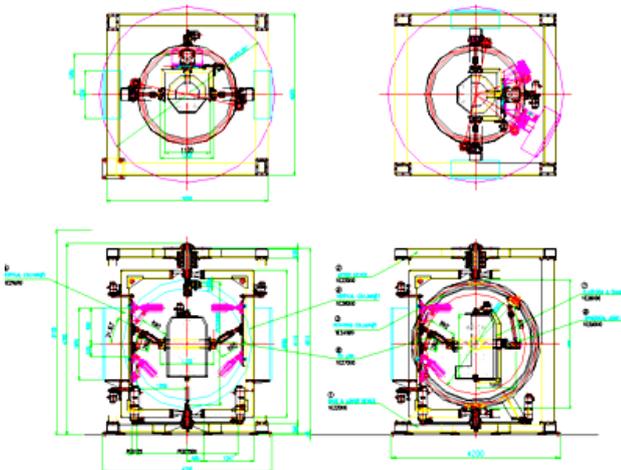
Assembly drawing of the Eclipse-II one-man ride machine
